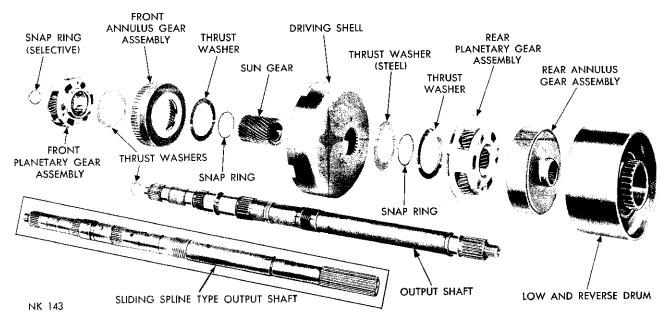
Planetary Gear Assemblies, Sun Gear, Driving Shell, Low-Reverse Drum and Output Shaft
